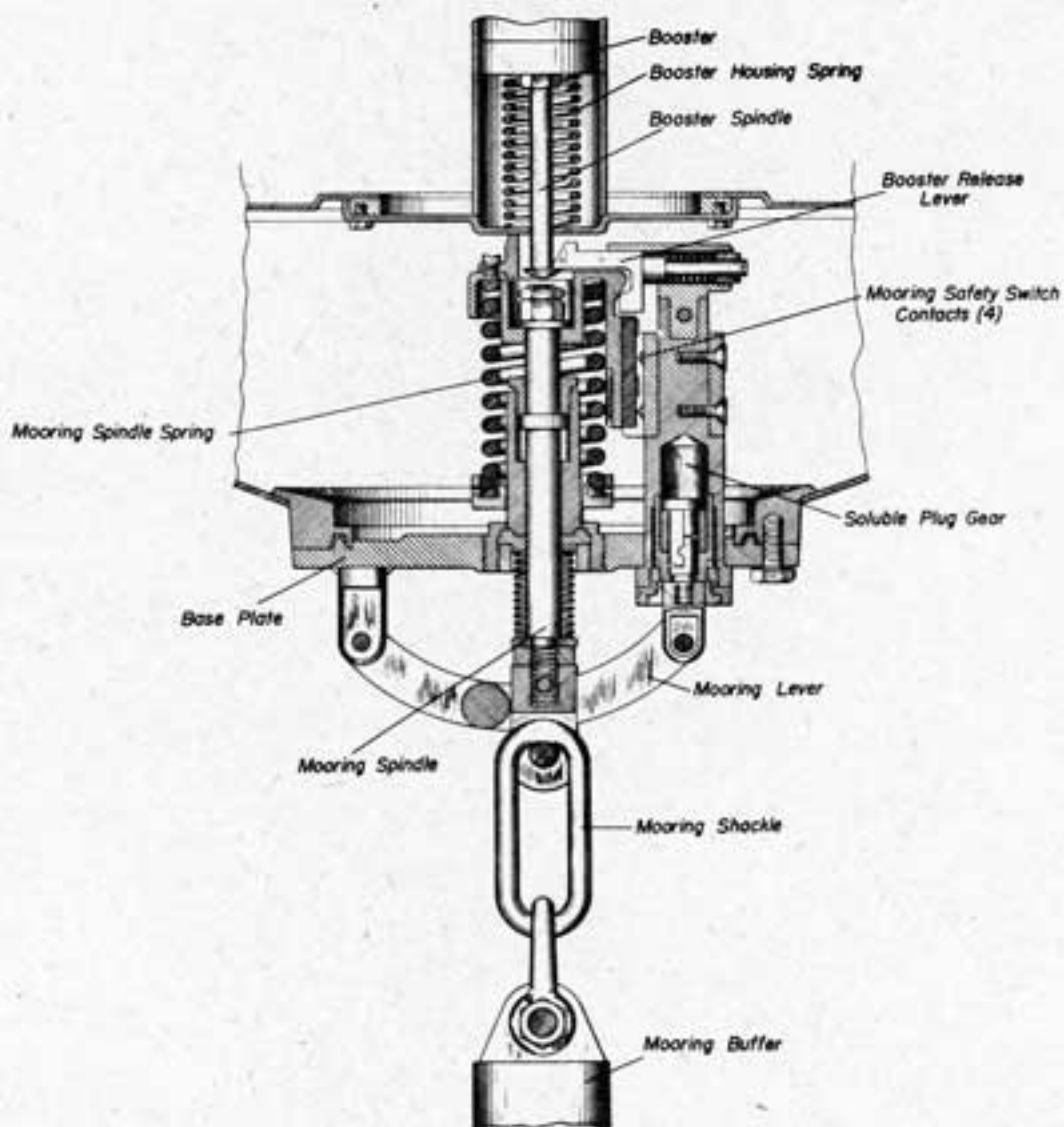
Mine Type IK, Base Plate, Showing Booster Release Mechanism, Sectional View
